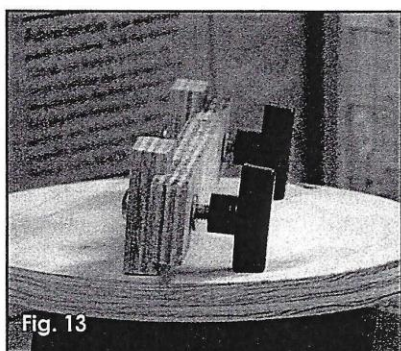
The assembly is held together with carriage bolts and threaded knobs.
